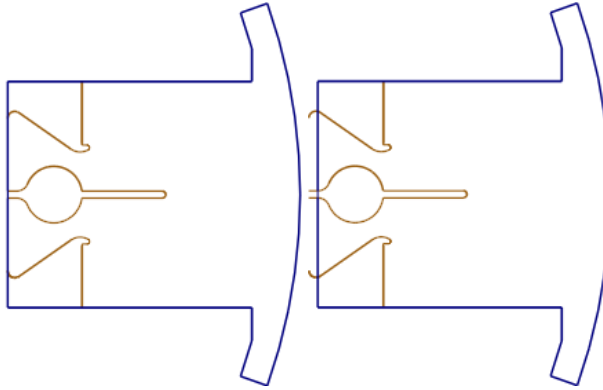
Sketch of how the shape cut by the electric discharge machine at the bottom of a twisted tooth (left) and the top of a twisted tooth (right), marked in bronze color. Original shape of bonded tooth in blue.
